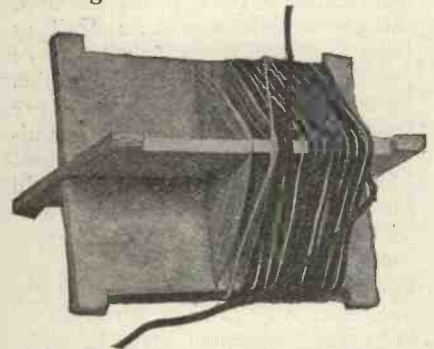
The coil shown in Fig. 8 with greater part of outer winding removed to show inner coils.
